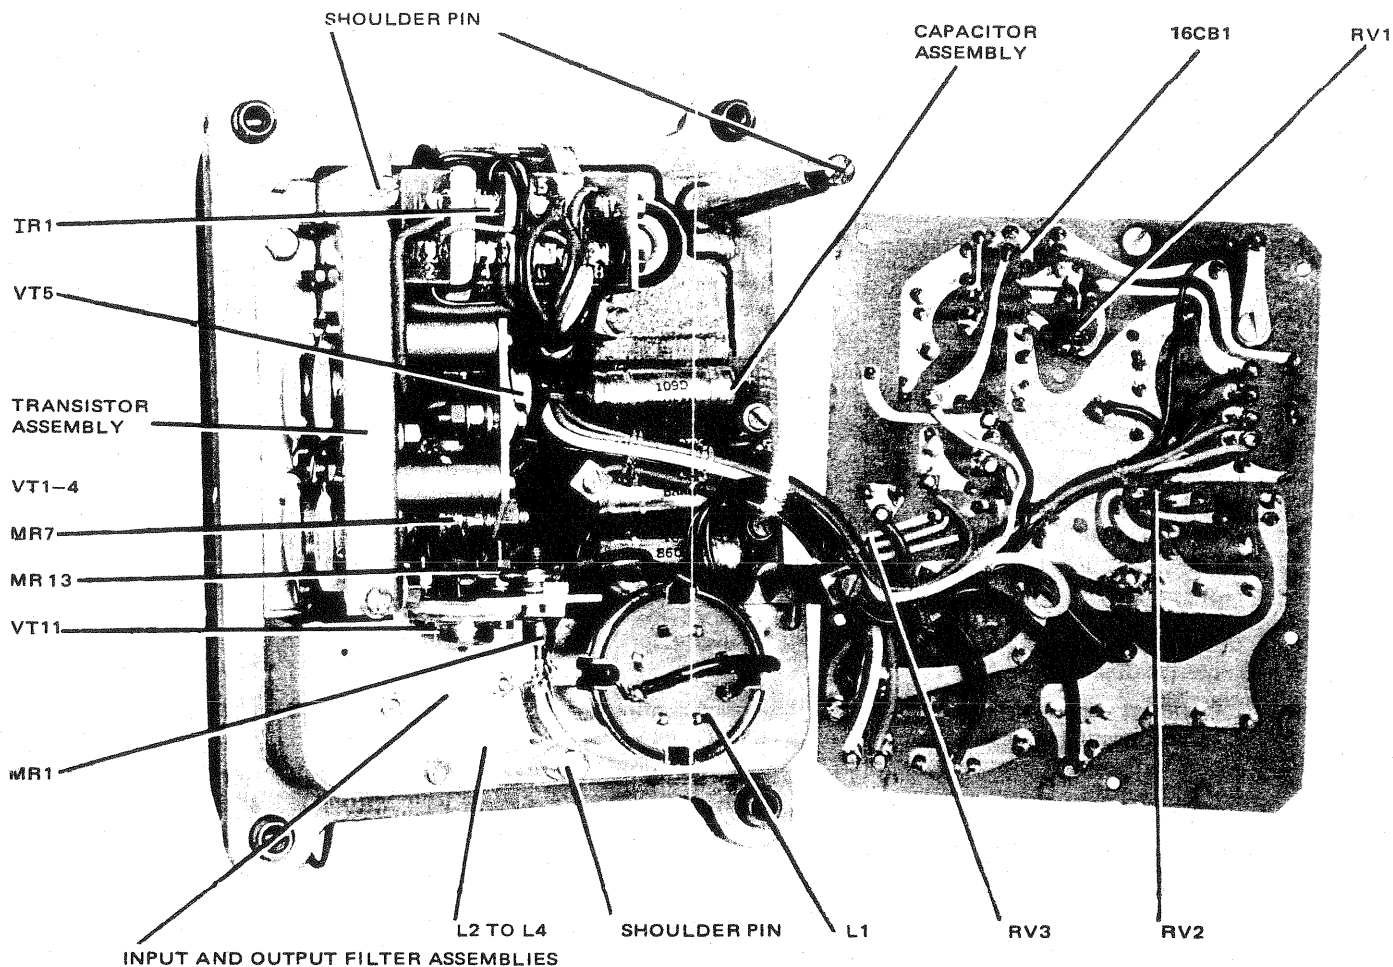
REAR VIEW OF ASSEMBLIES (OPENED EQUIPMENT)
